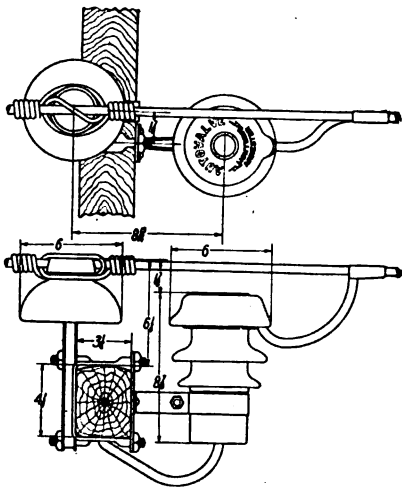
SIDE AND TOP VIEWS OF 7500-VOLT ARRESTER WITH FORM C MOUNTING BRACKET AND PIERCE CLAMP PIN
